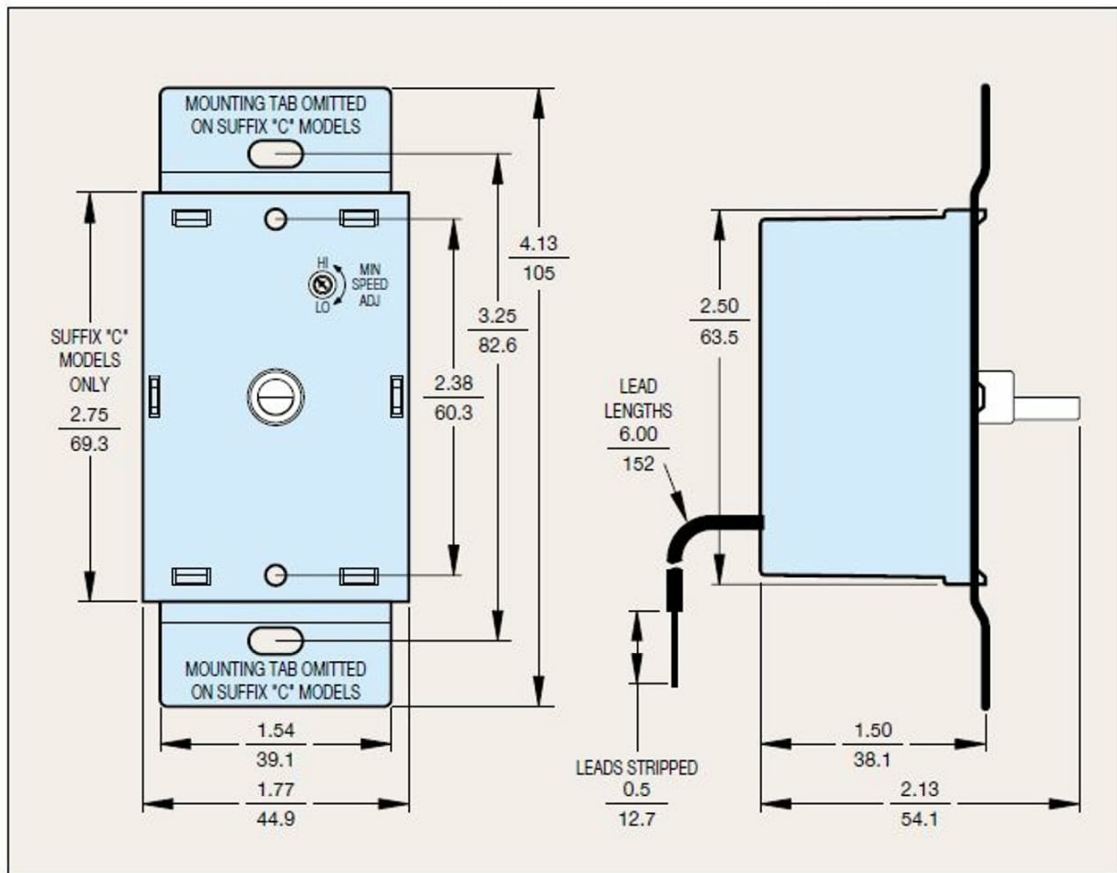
Technical drawing illustrating the dimensions and internal layout of the KB Electronics 8811007 control.
